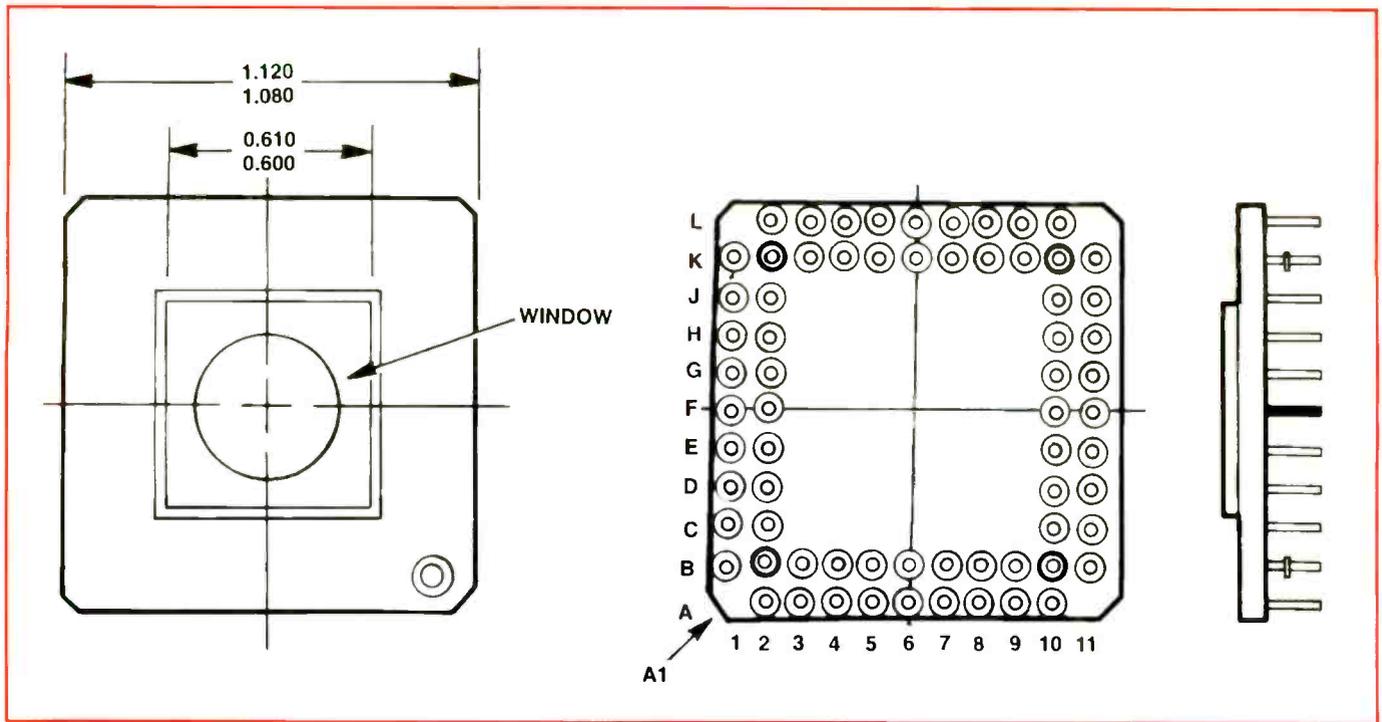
A pin grid array (PGA) is a square package with pins covering the entire bottom surface of the package.
